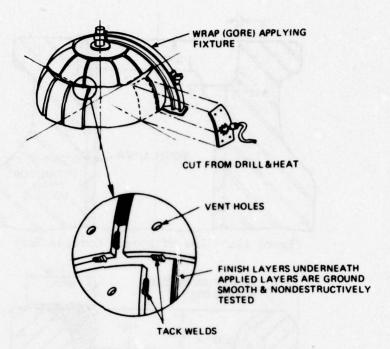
Layered Hemispherical Head Fabrication Procedure
